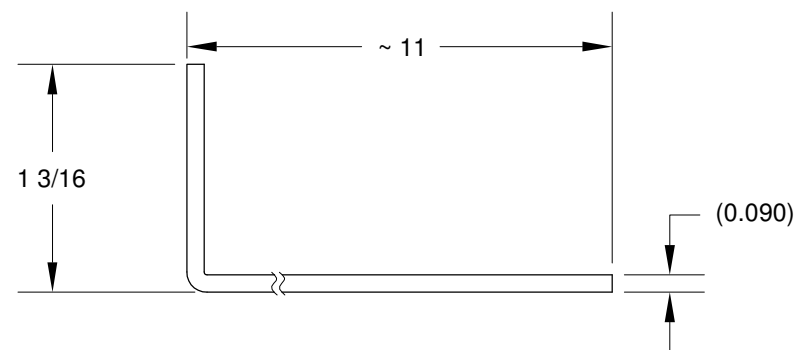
FABRICATING THE COWL TOP LEFT HINGE PIN
